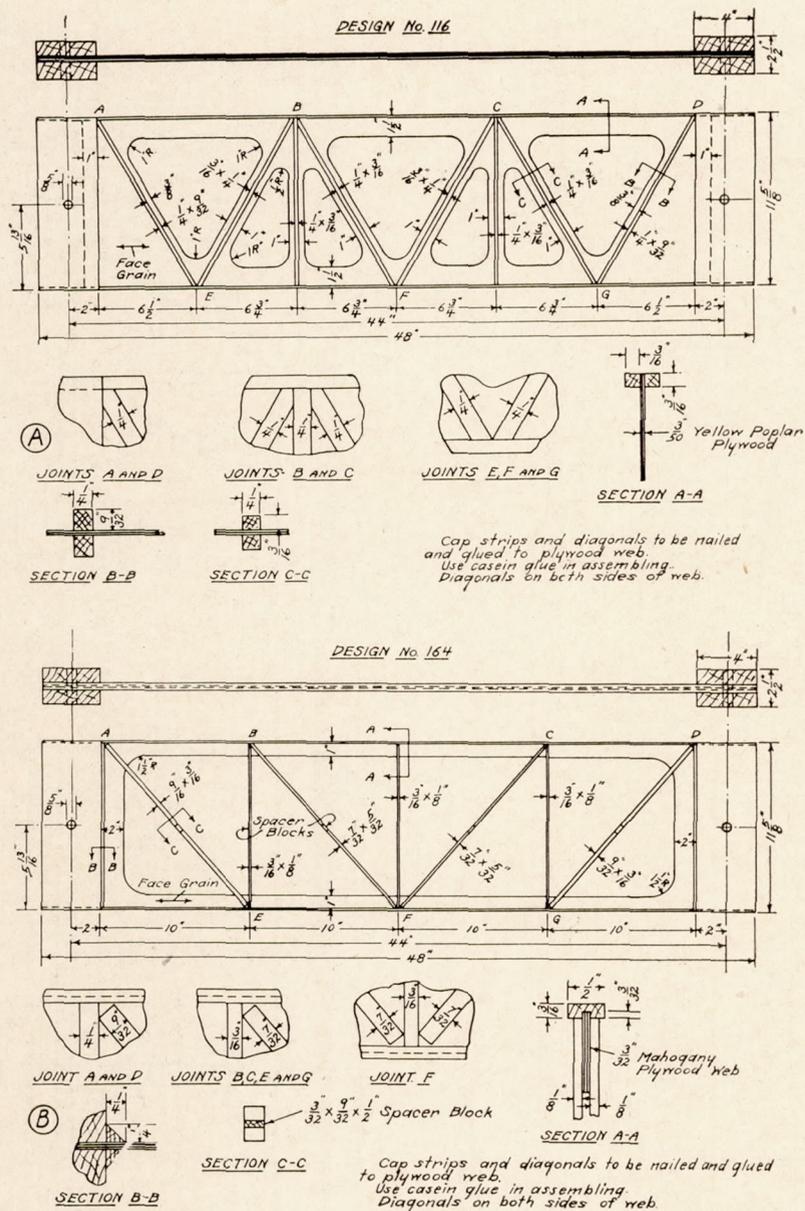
Designs No. 116 and 164 of rib sections 11½ inches deep. No. 116 is of the reinforced-plywood truss type. No. 164 represents an extreme lightening of the plywood web and double truss members with spacer blocks at their centers
